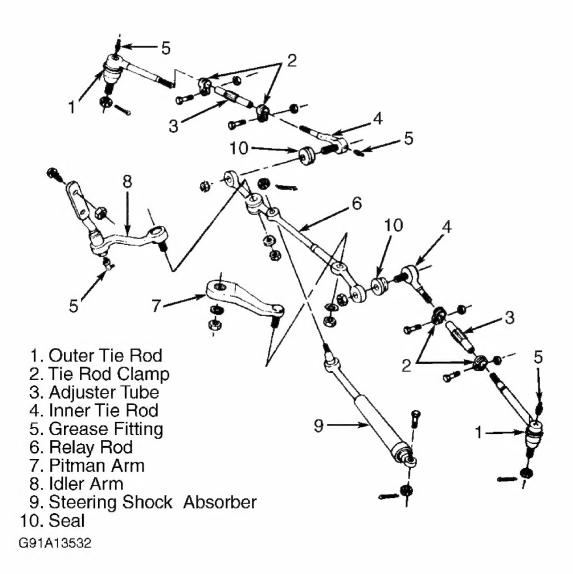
Exploded View Of Steering Linkage ("T" Series) Courtesy of GENERAL MOTORS CORP.
